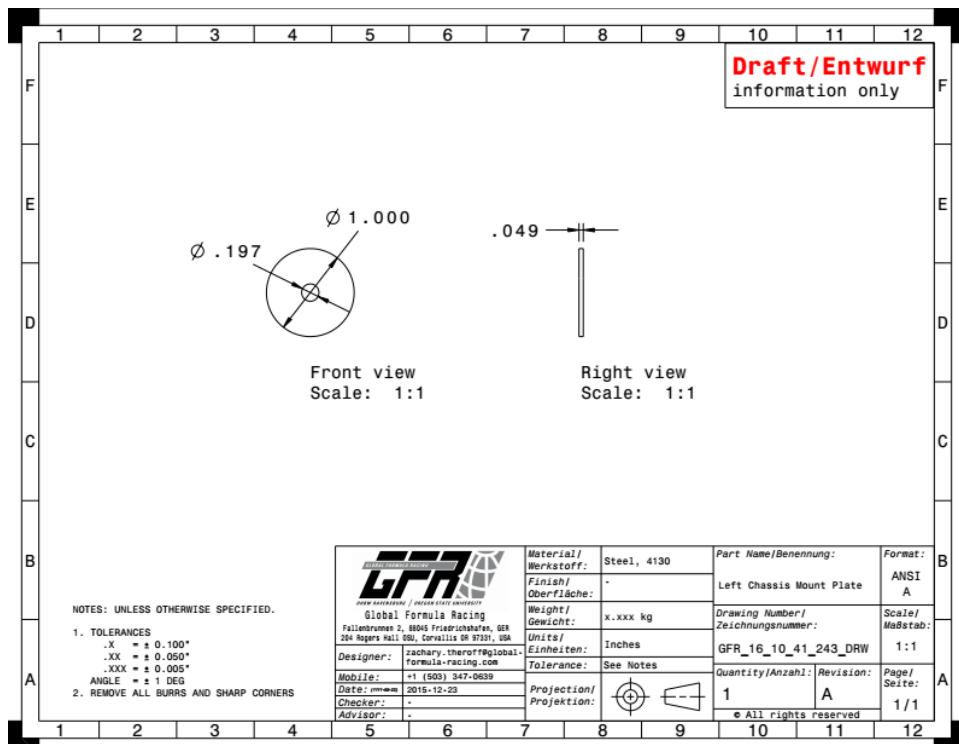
Plate that is welded to the end of the chassis mount tube and bolts to the chassis.
